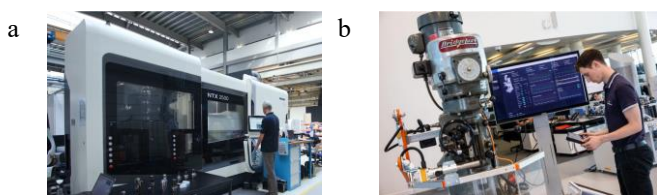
Examples of machine tools: (a) larger and; (b) smaller exemplar.
